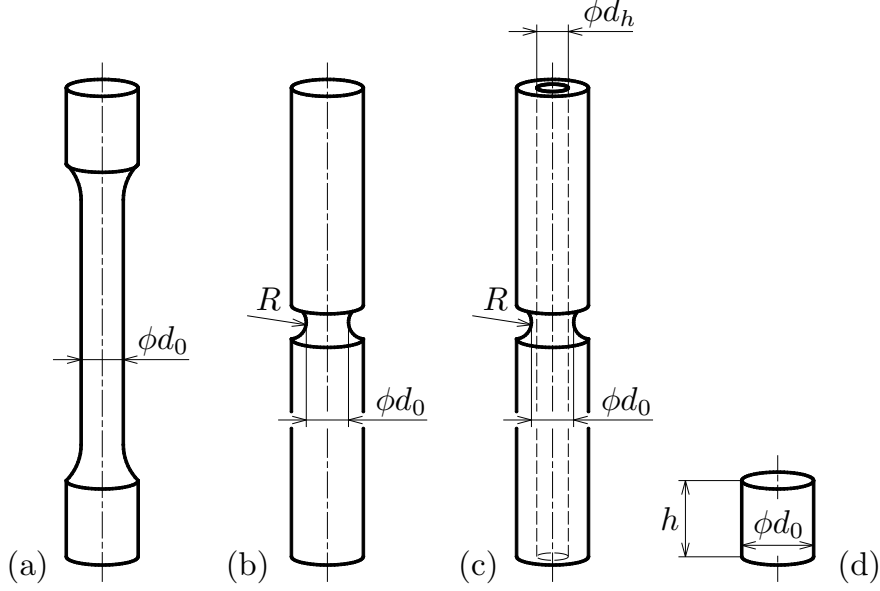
Schematic drawings of specimen types and dimensions used in the experimental program: (a) smooth cylindrical; (b) notched cylindrical; (c) notched tubular; (d) cylindrical.
